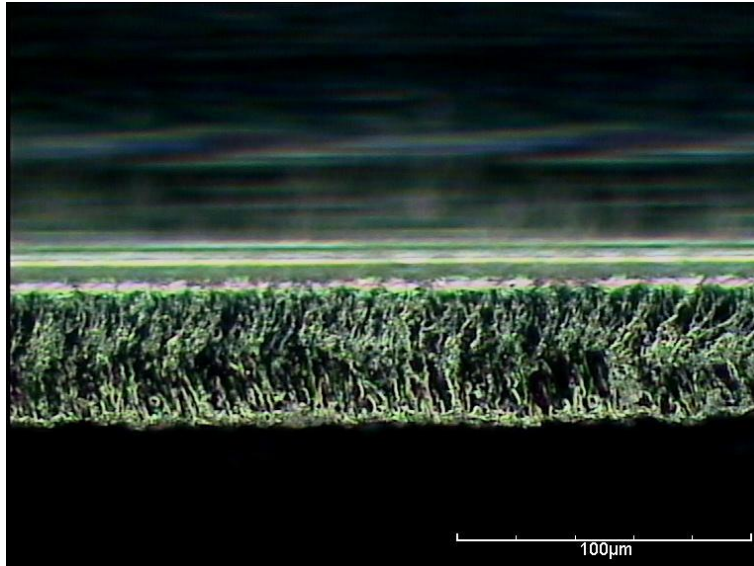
Magnified view of the side wall of the material after cutting in Mode 2, showing the LMJ cut section.
